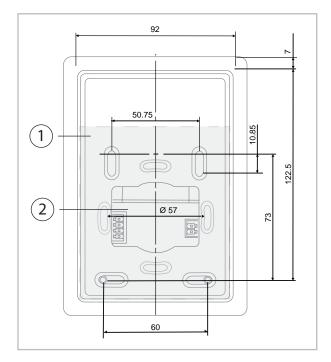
Layout and dimensions of the back plate of the wall bracket
